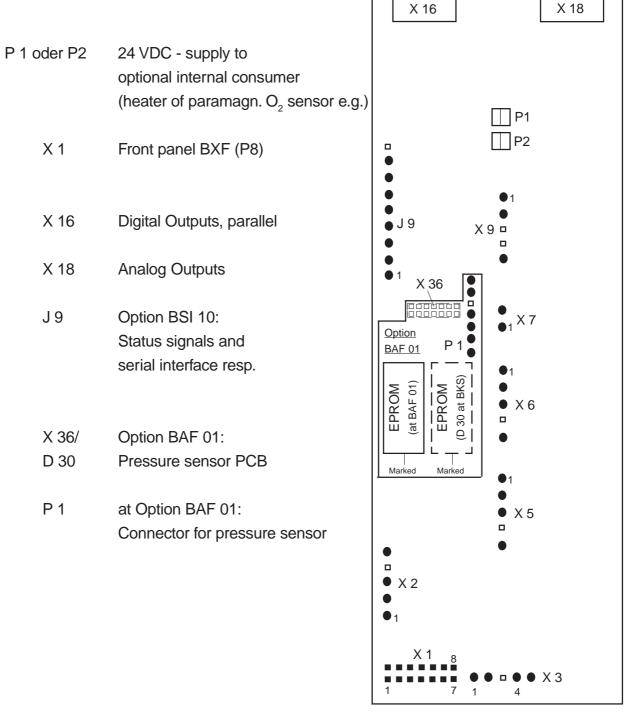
PCB "OXS", assembled, horizontal projection
